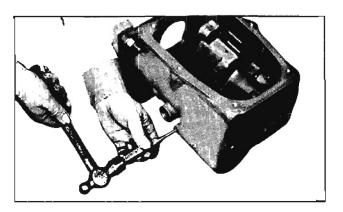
Driving Lock Pin Into Idler Shaft
